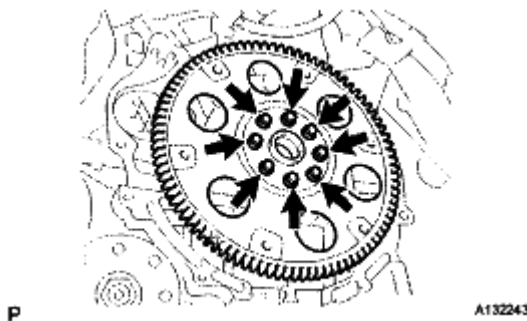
Locating Bolts, Front Spacer, Drive Plate And Rear Spacer
